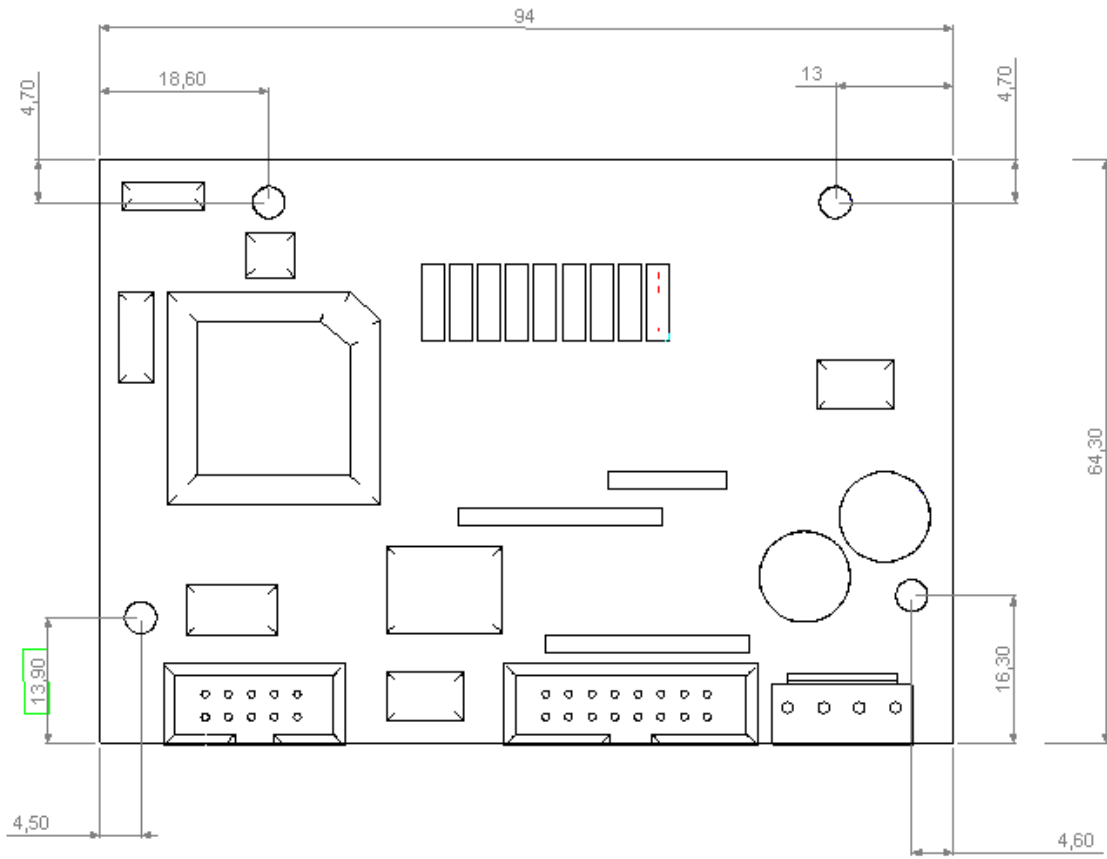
180X / 190X physical dimensions and hole placements.
